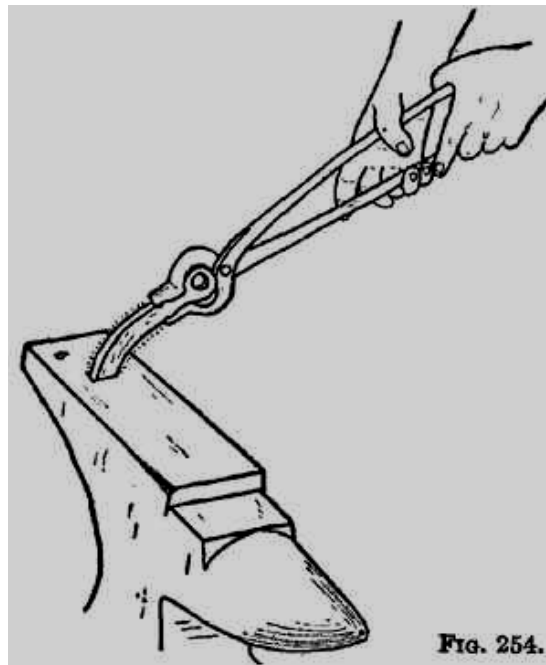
Bending of heavy pieces can sometimes be best accomplished in the hardy hole.
